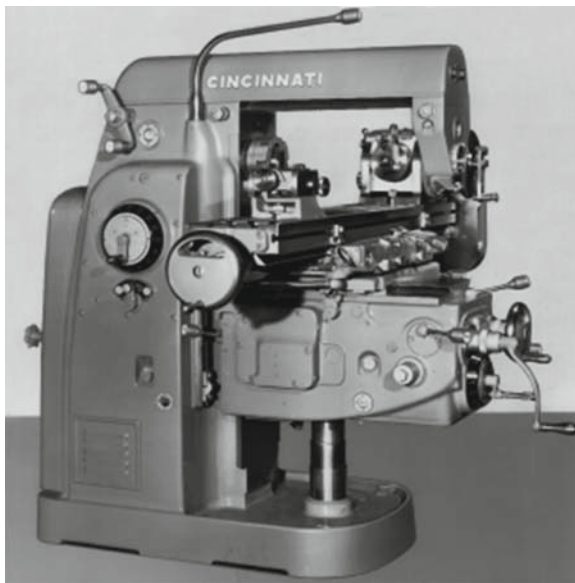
The universal knee and column type horizontal milling machine is used for machine flat, angular, and contoured surfaces (Cincinnati Machine, a UNOVA Co.)
